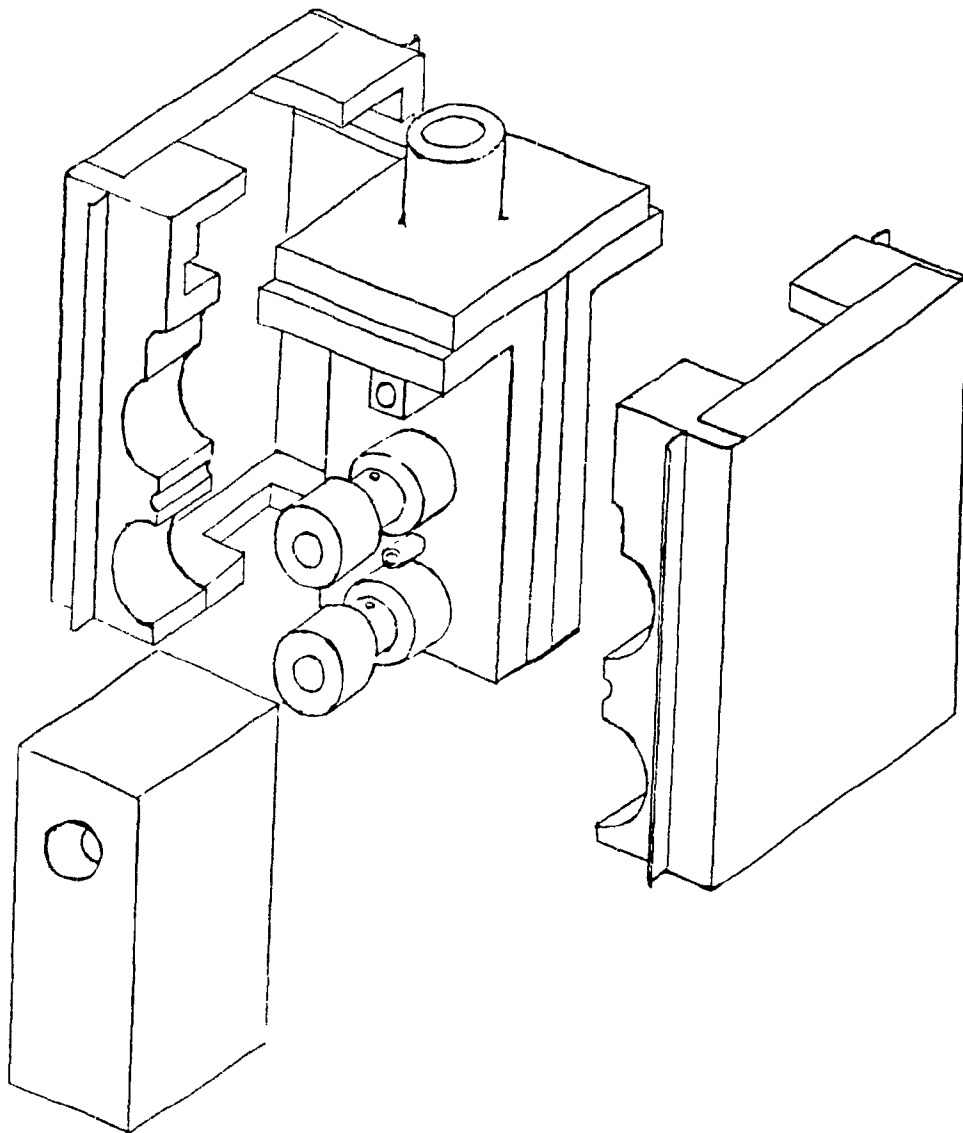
Schematic Assembly of Rheometer and Insulative Housing
